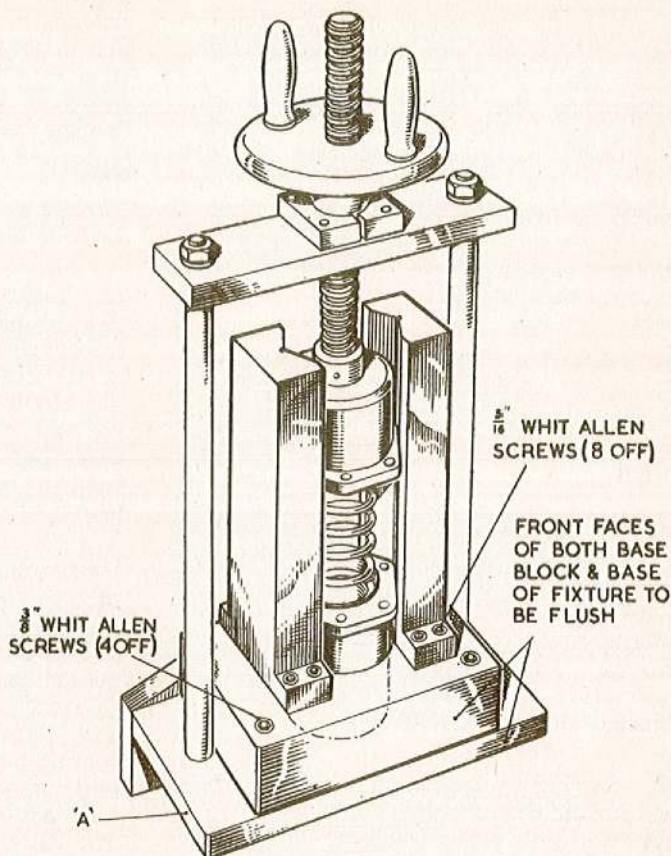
Stripping and assembling fixture with base block and side pillars fitted
